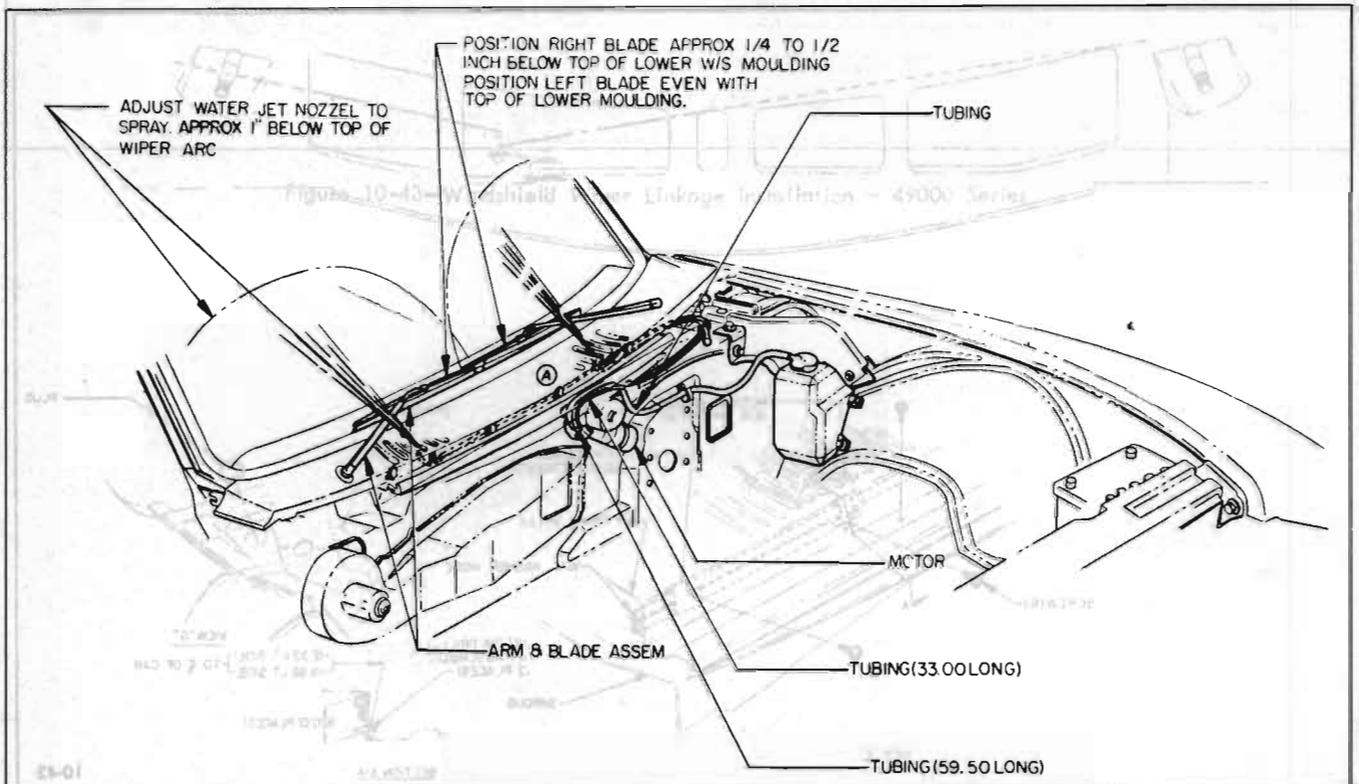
Windshield Wiper and Washer Installation - 49000 Series
